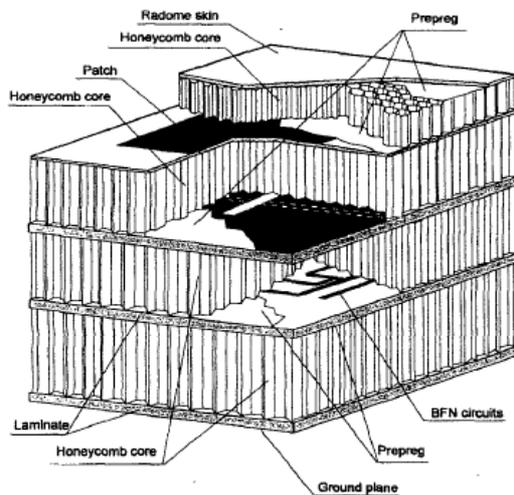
A : Printed antenna in honeycomb sandwich technology.
